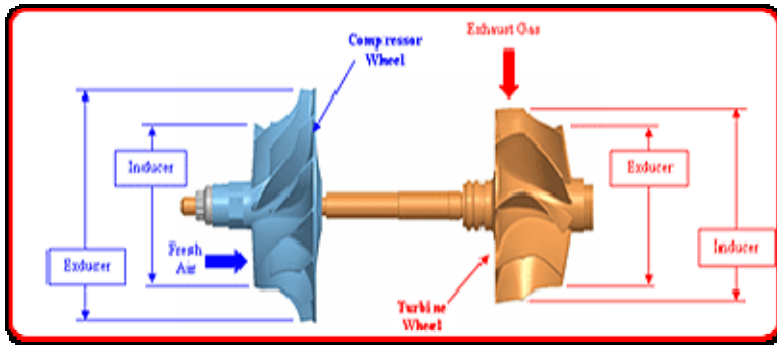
Illustration of the inducer and exducer diameter of compressor and turbine wheels
